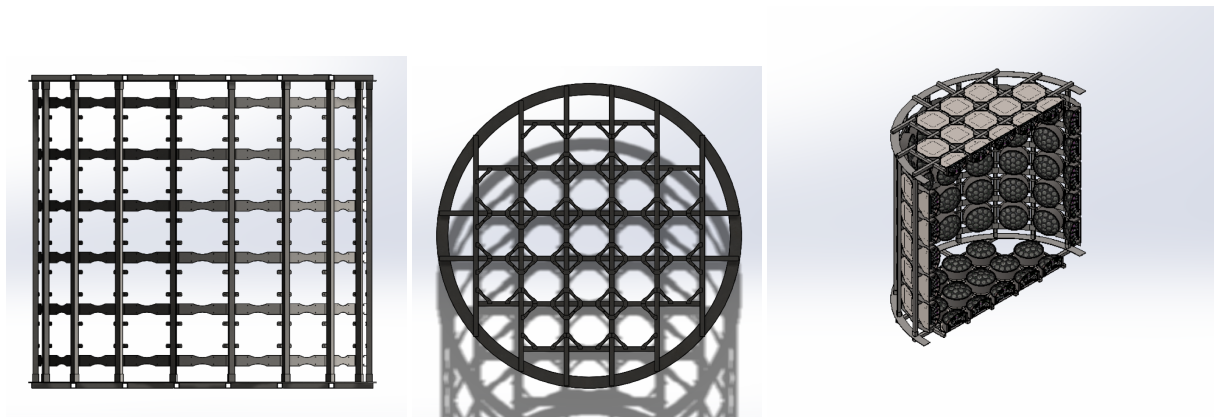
Drawings of the WCTE mPMT support frame. Left: A side view of the barrel region. Middle: A top view of the bottom and top end caps. Right: A cross section view of the support frame with mPMTs mounted.
